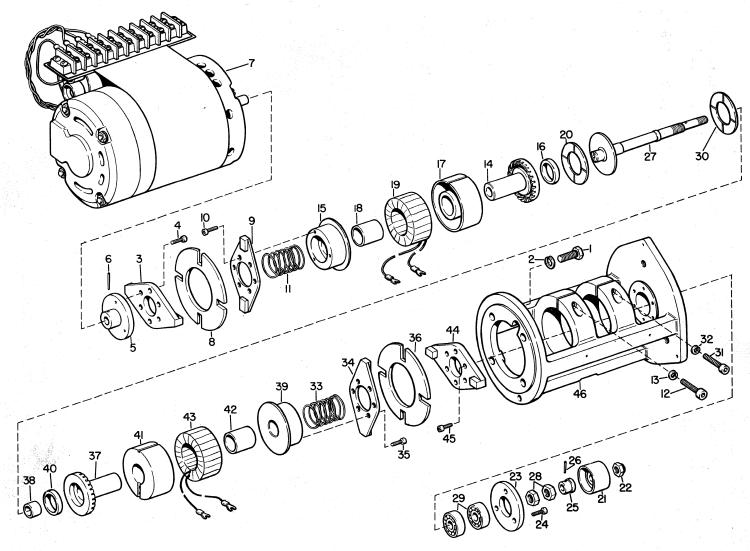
627 00 UNIDIRECTIONAL CLUTCH ASSEMBLY EXPLODED VIEW
